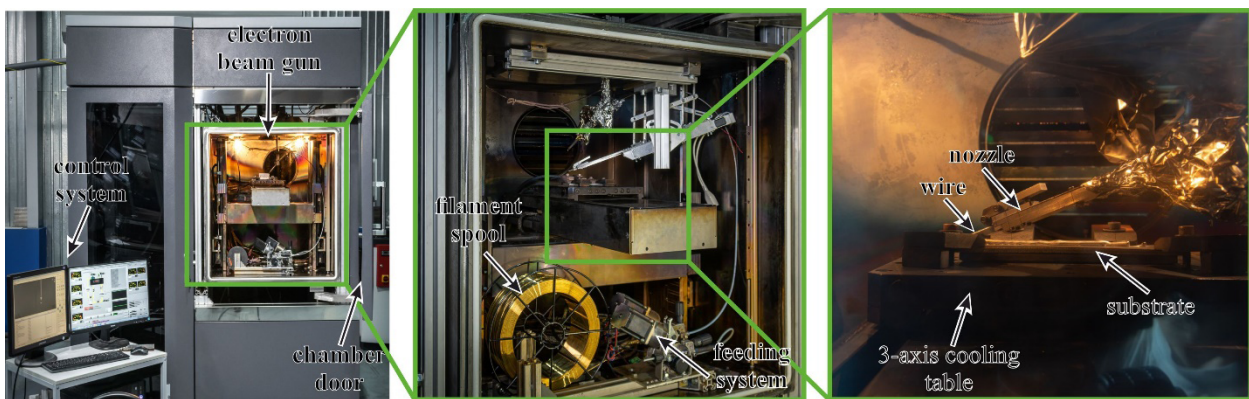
Vacuum chamber of the laboratory experimental installation for electron beam additive manufacturing
